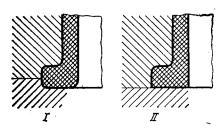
Incorrect (I) and correct (II) shape of part surfaces formed at mould parting face
